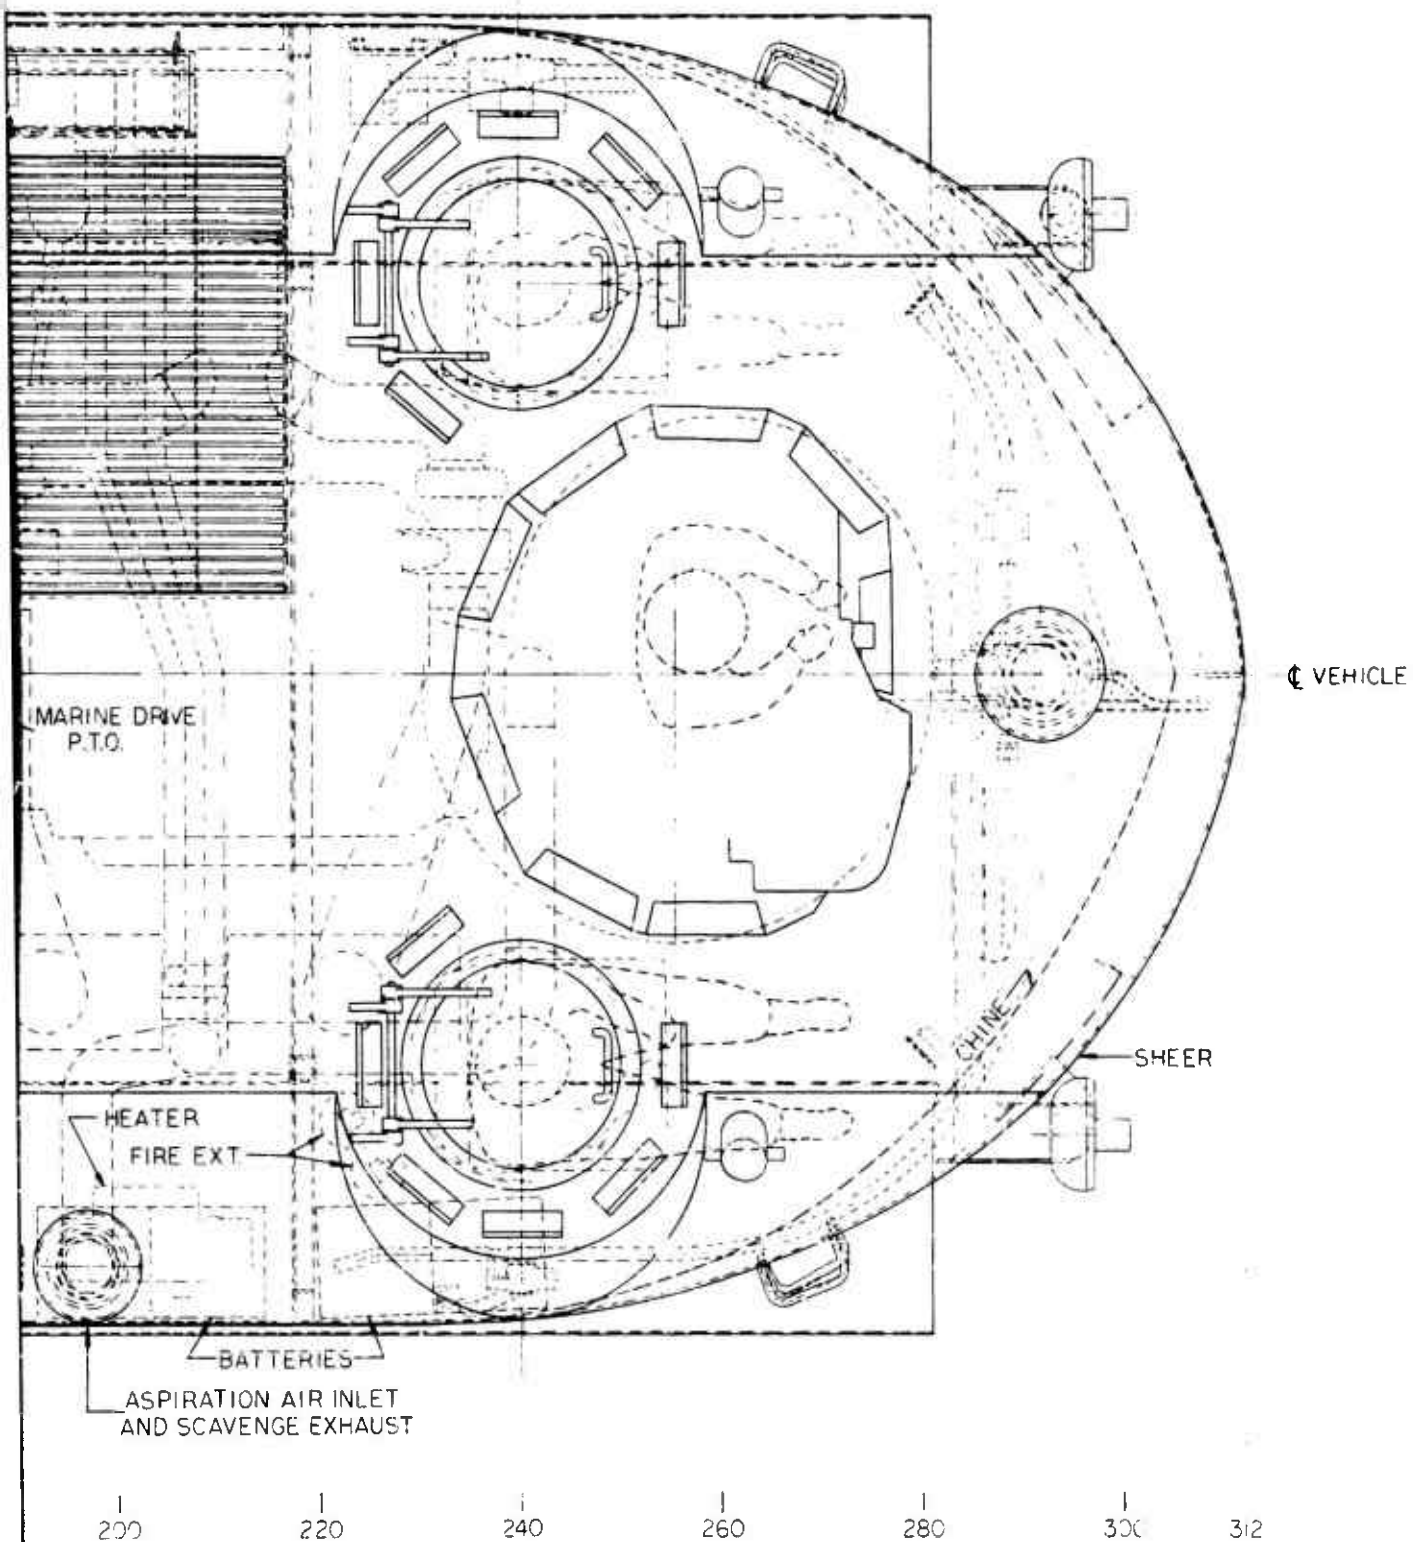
SCREW PROPELLED LVTPX12 - PLAN VIEW
